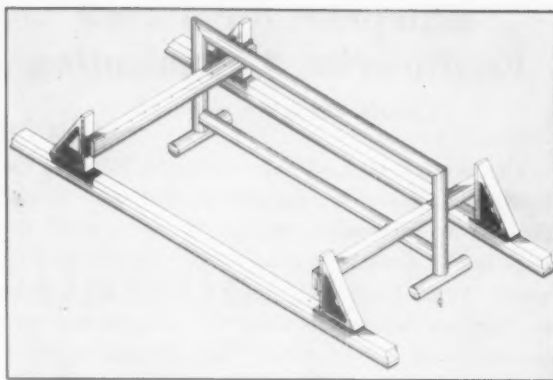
This schematic diagram shows how a tooling ways setup is used in place of a master tooling dock where it is desirable to position formers on a relatively small picture-frame.
